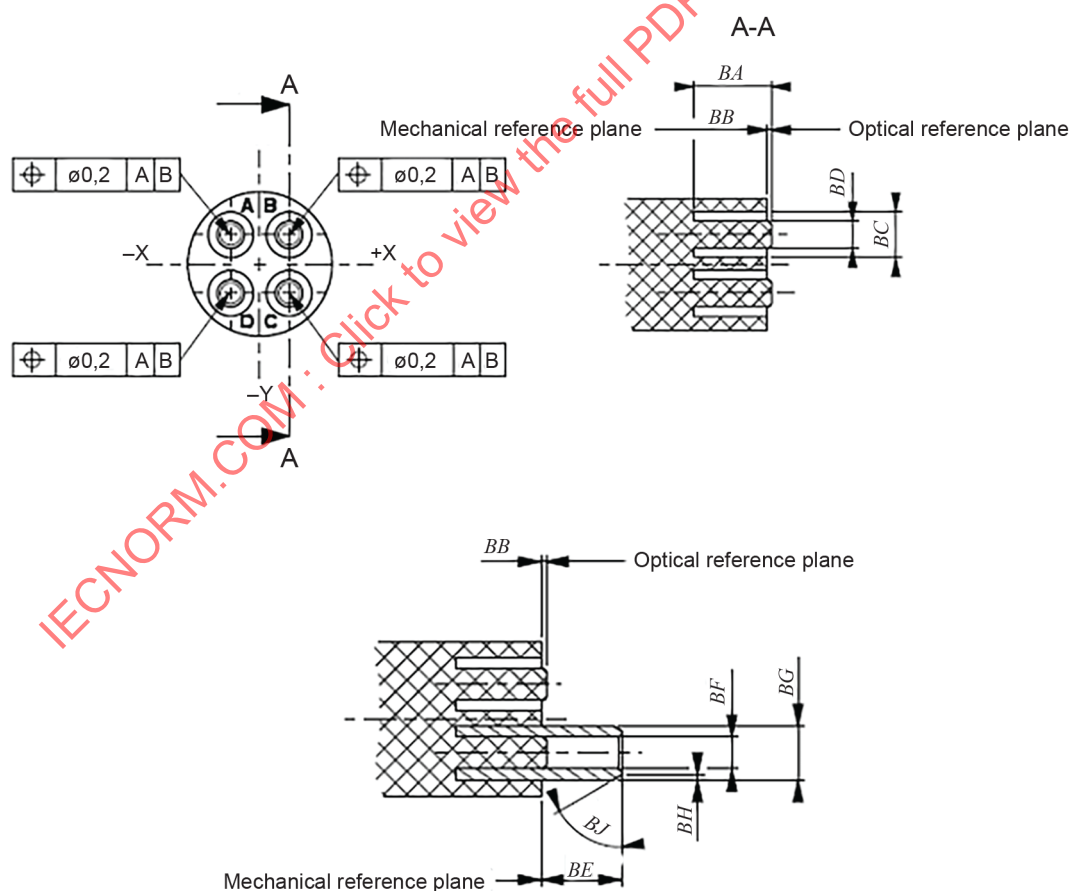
Insert's front view (top left) and side view without (top right) and with (bottom) adaptor
